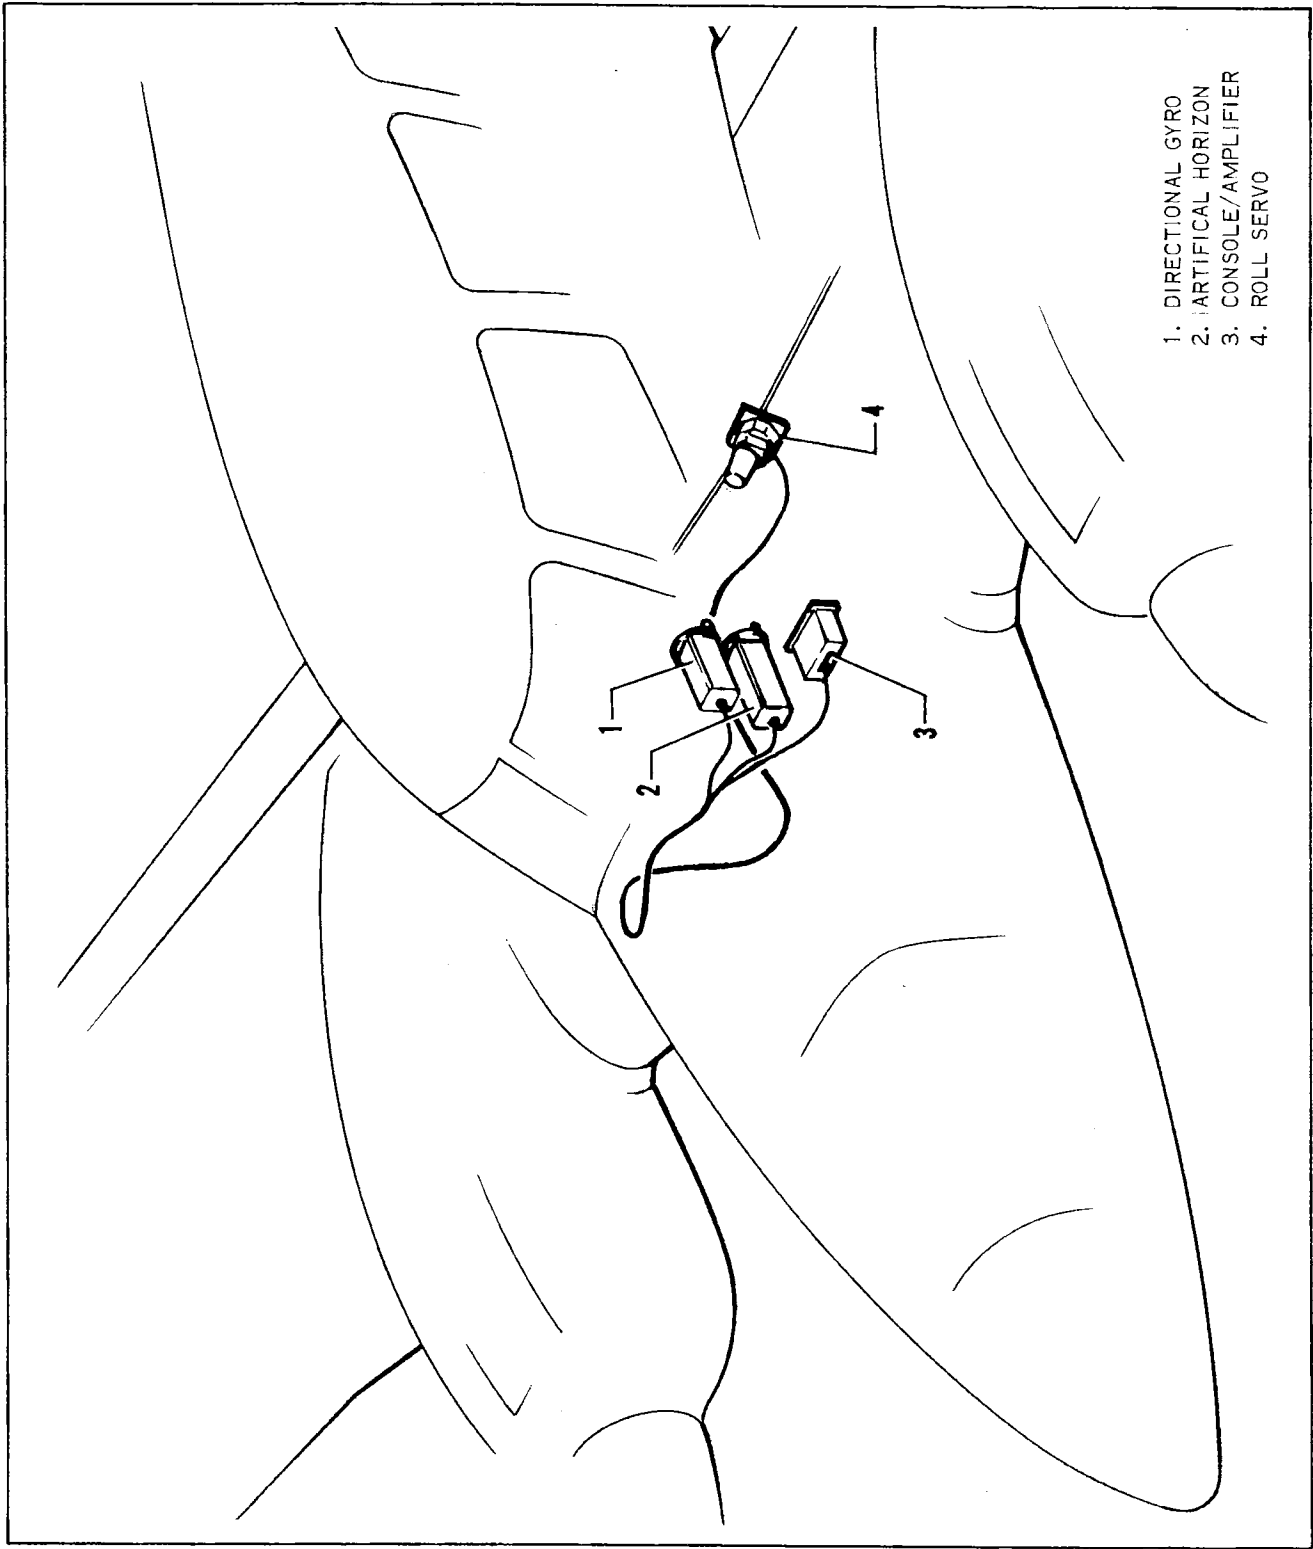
PA-23-250 (Six Place) AutoControl III B Layout
